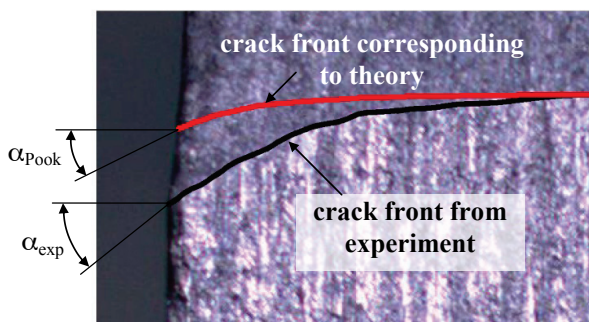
Development of the fatigue crack front from the initially straight crack front
